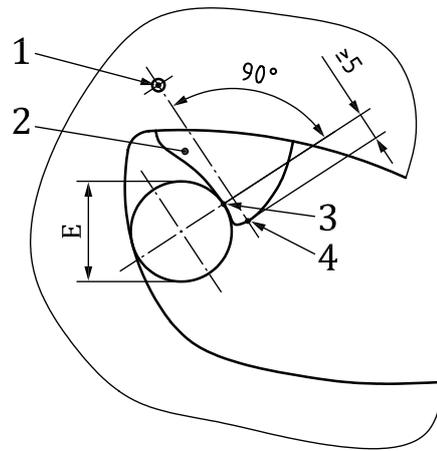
Clearance and distance between front and rear handles for rear handle machines
